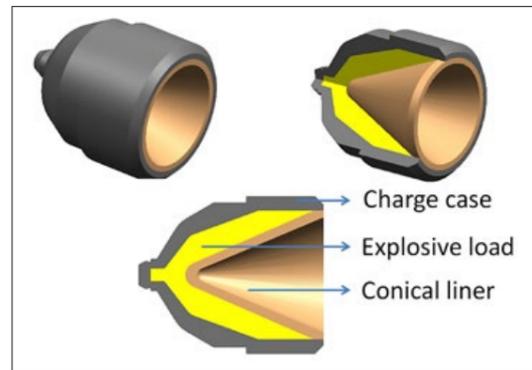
Design of shaped charge [2] (Courtesy EPMA)
